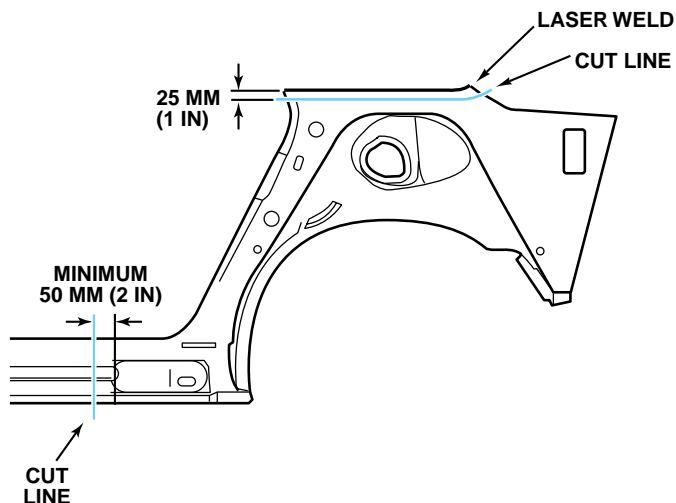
2000 DeVille Outer Wheelhouse Removal
